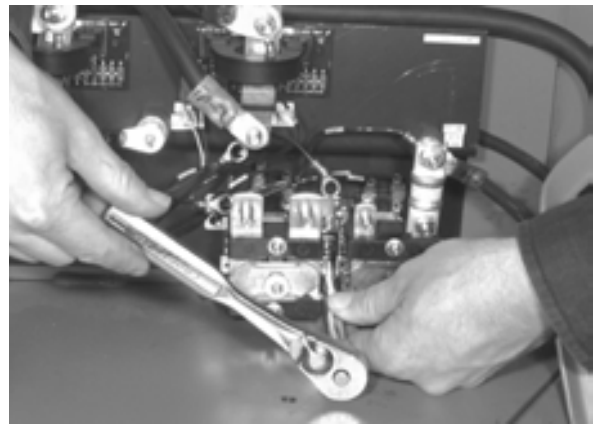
Remove the Nuts that Hold the X Contactor in Place
